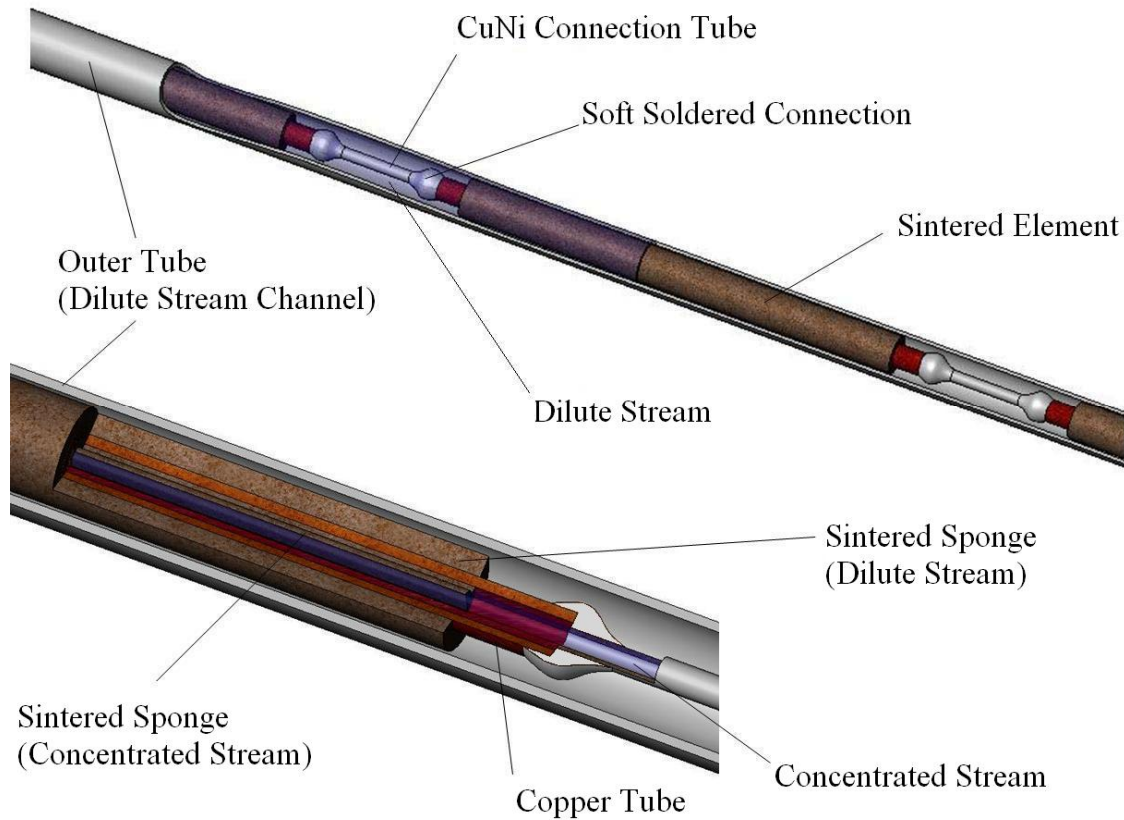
Three sintered copper elements soldered together and the cross-section of the H/X
